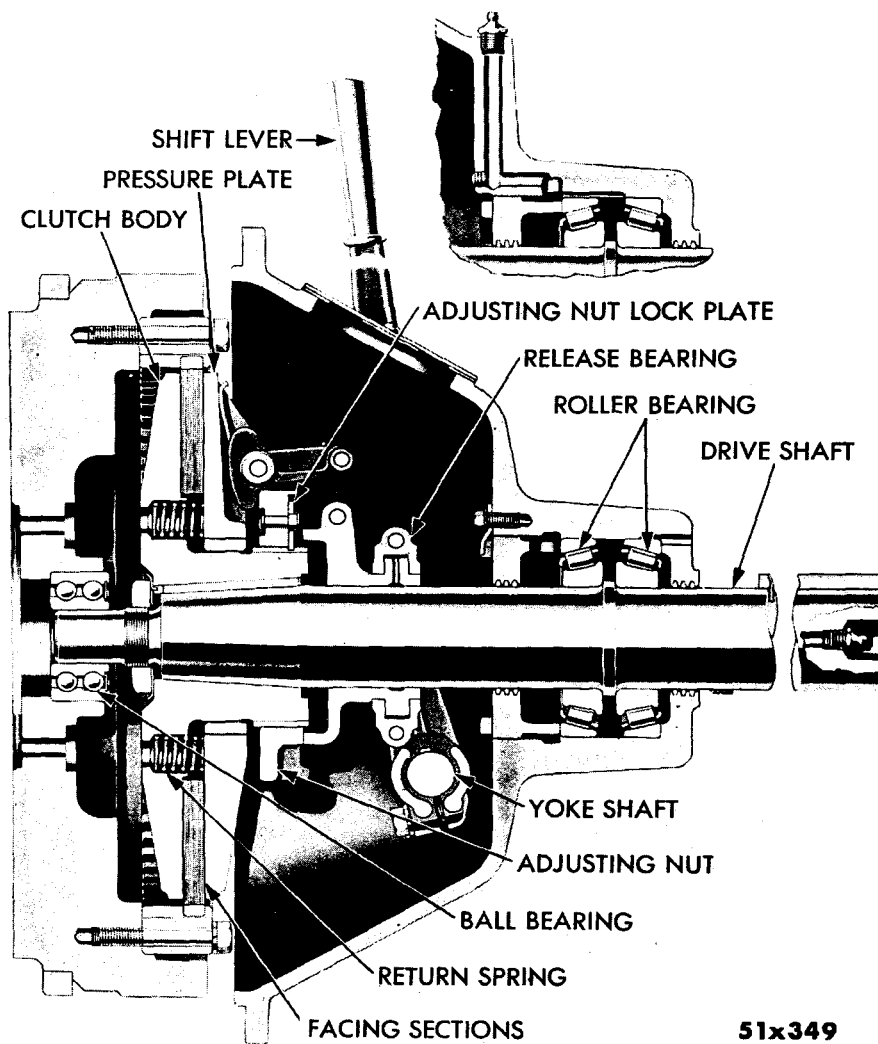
Power Take-off With Heavy Duty Clutch (Sectional View)
